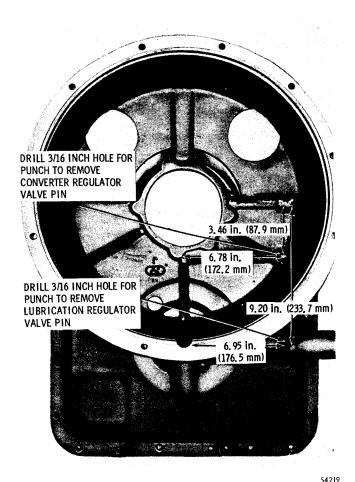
Location of holes for removal of lubrication and converter regulator valve pins
